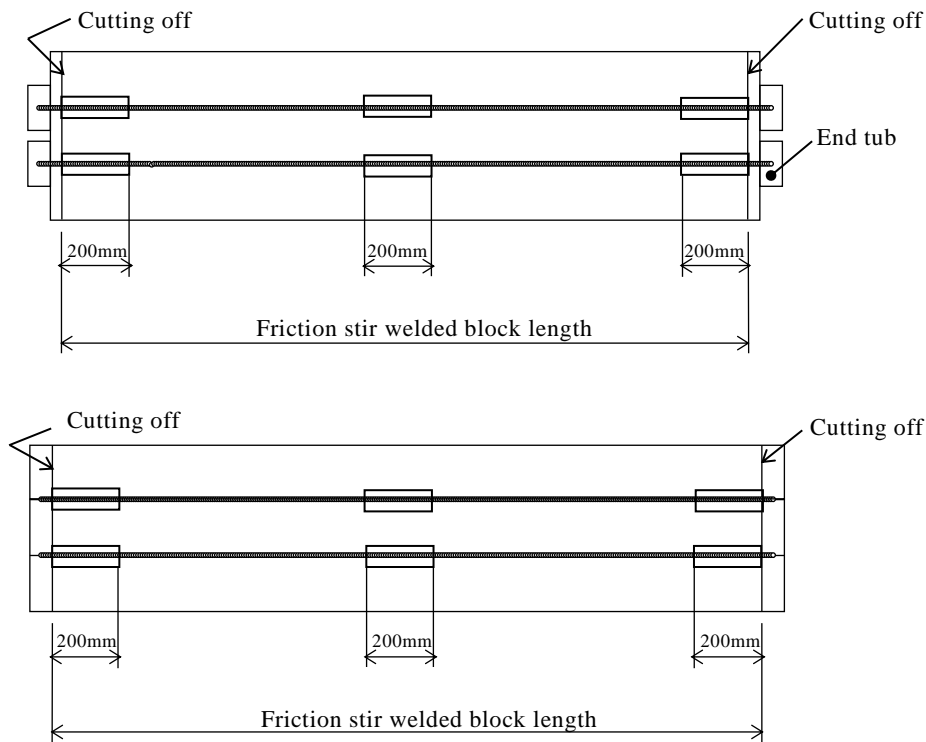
Scope of Ultrasonic Flaw Detection Test for Friction Stir Welded Blocks After First Product
